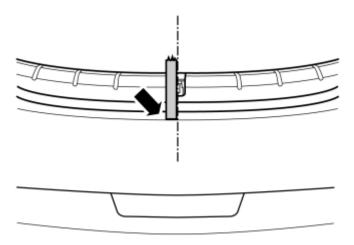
Applying Tape And Marking Center Of Bumper Casing Courtesy of VOLVO CARS CORPORATION
